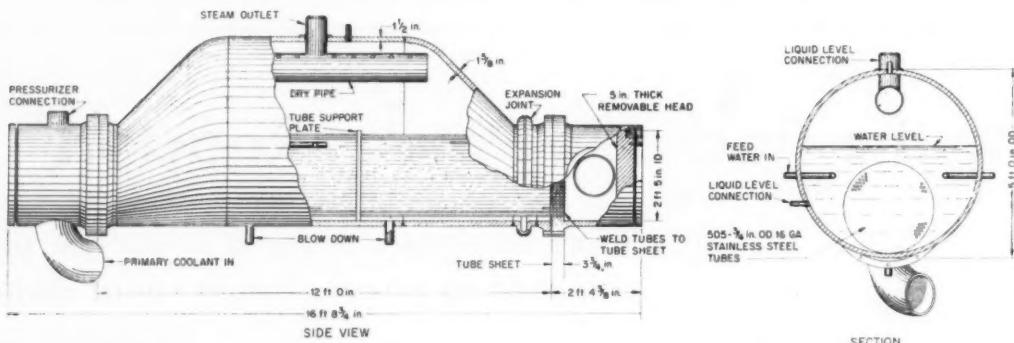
Main heat exchanger for the generation of steam is a single-pass horizontal shell-and-tube type
